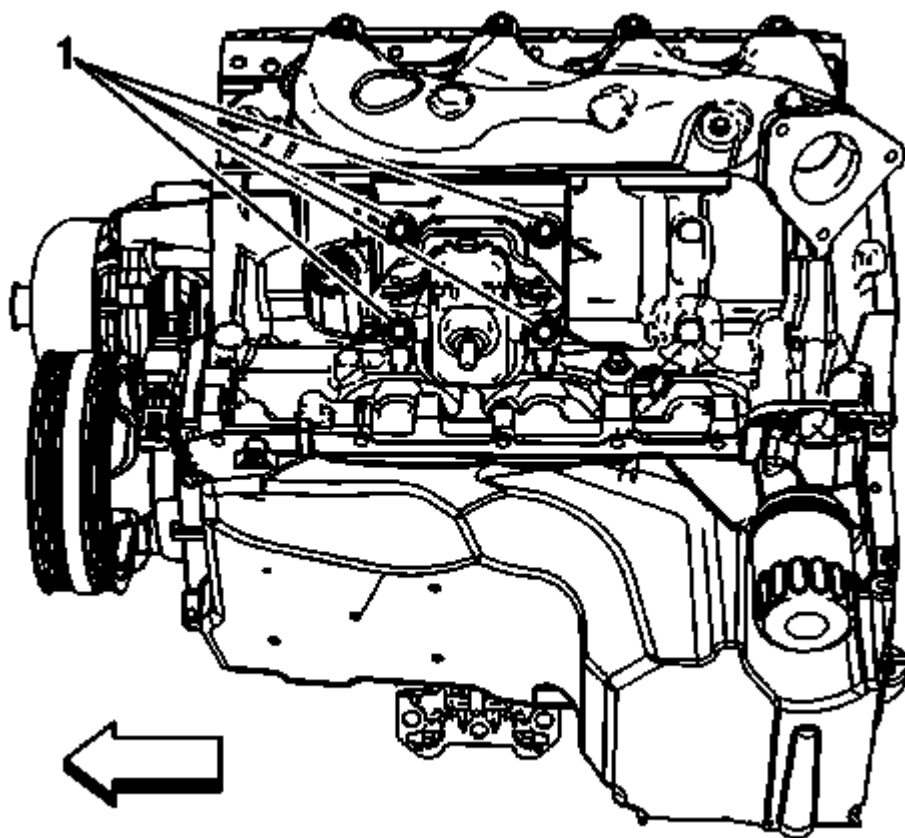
View Of Engine Mount To Frame Bolts
